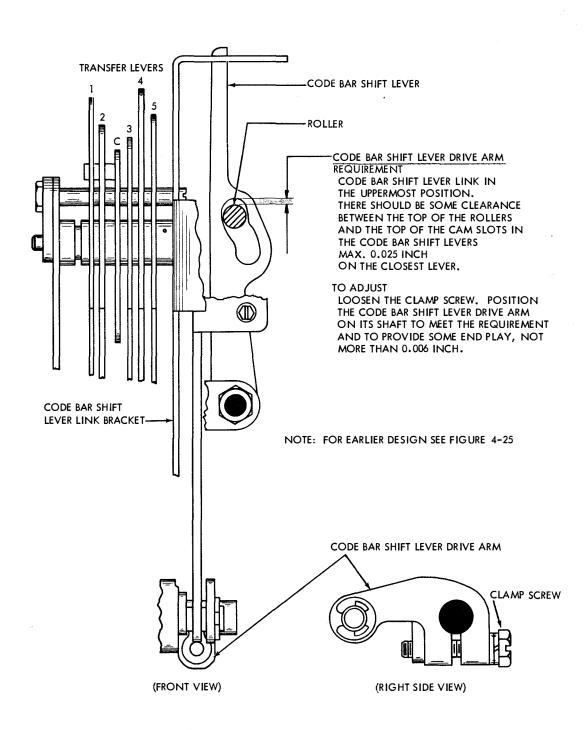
TYPING UNIT, CODE BAR SHIFT MECHANISM
